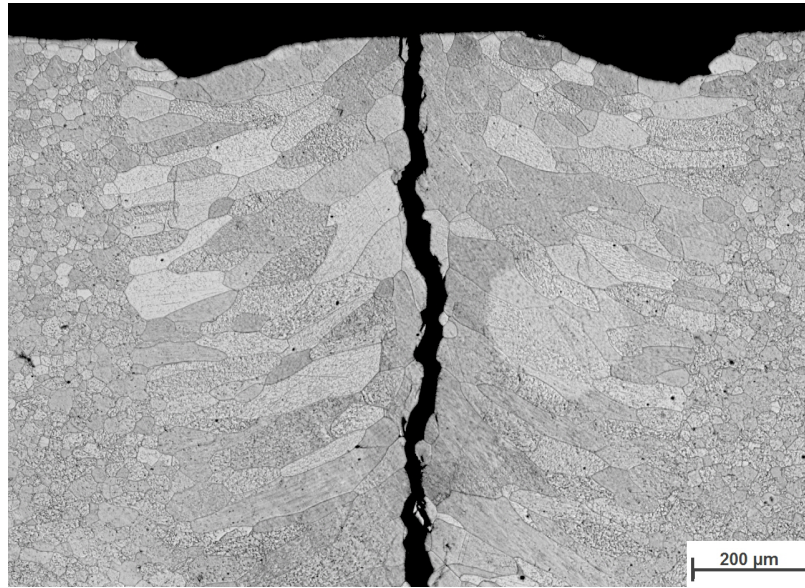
Transgranular fracture in weld XI after PWHT.
